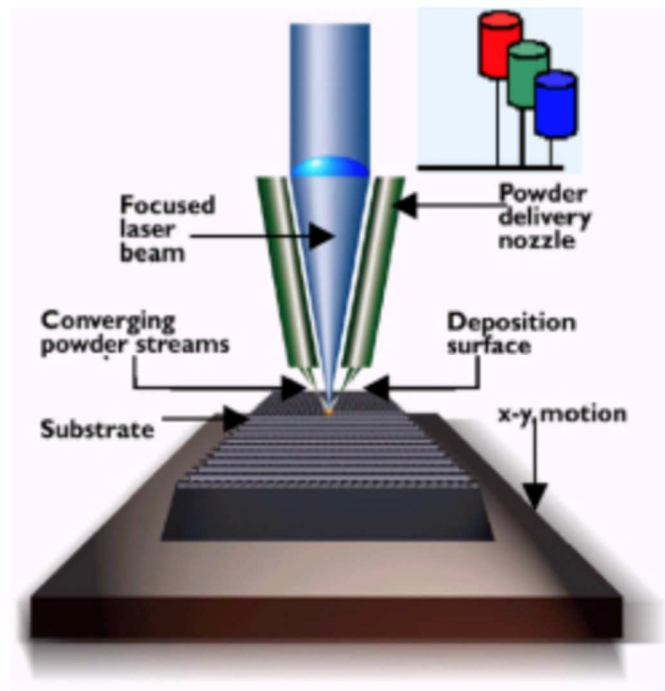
The LENS process (courtesy of Welding Journal)
